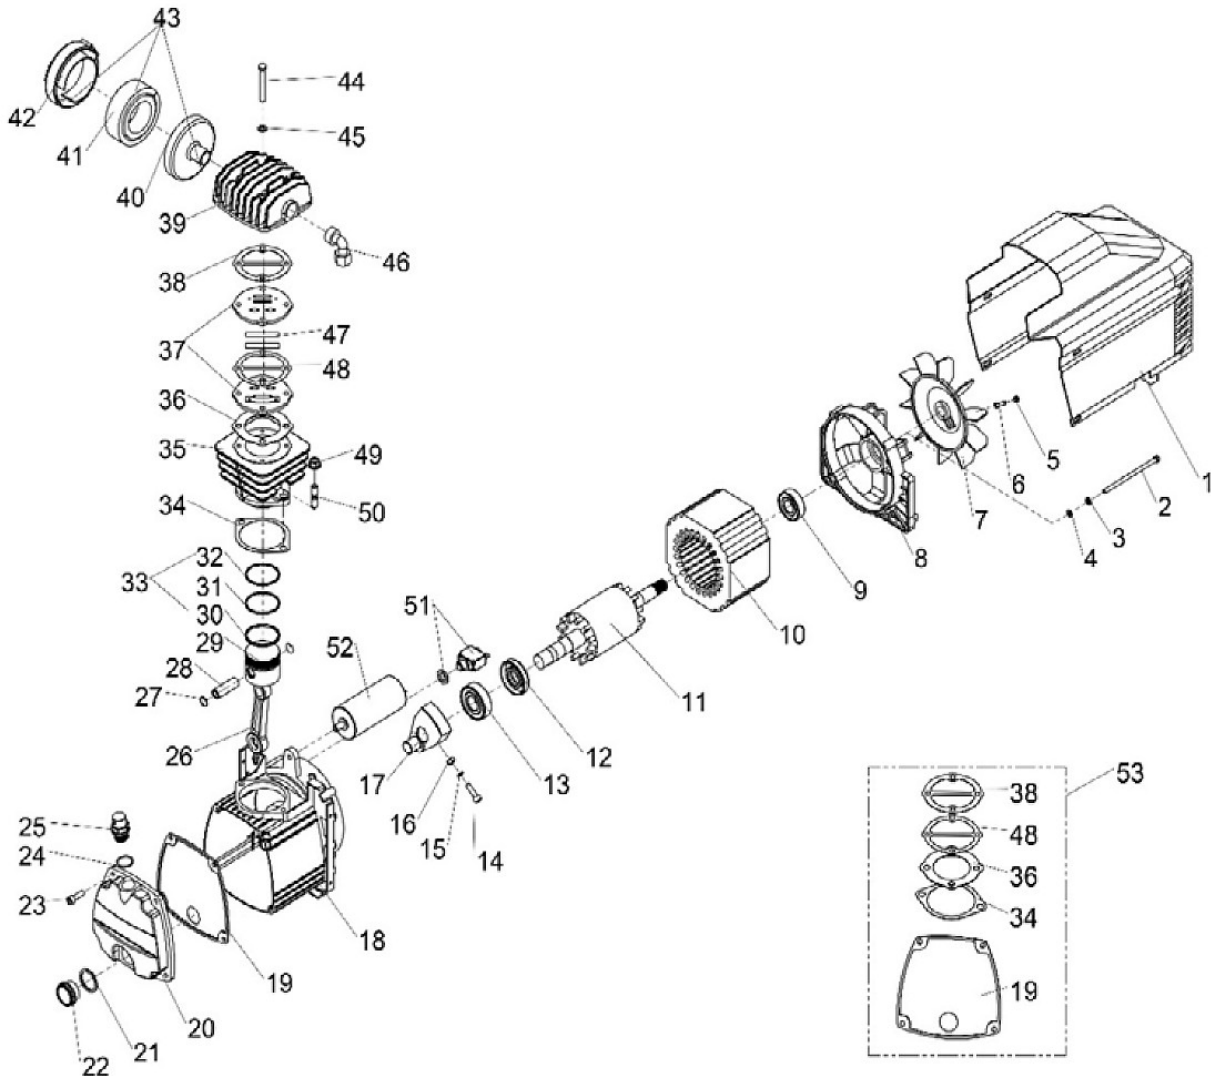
Spare parts drawing 2 - Compressor MOBILBOY AC 261/24 AC
